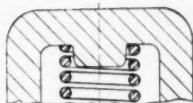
When a spring is to be used in a large cored hole where the outside diameter of the spring is considerably less than the hole diameter, a nubbins can be cast integrally, as indicated in this cross-sectional sketch.
